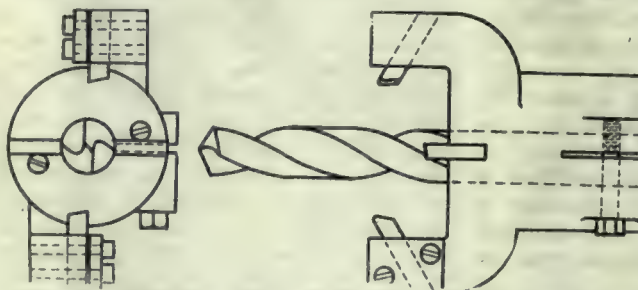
TURNING TOOL CARRYING DRILL USED ON SCREW MACHINE.
